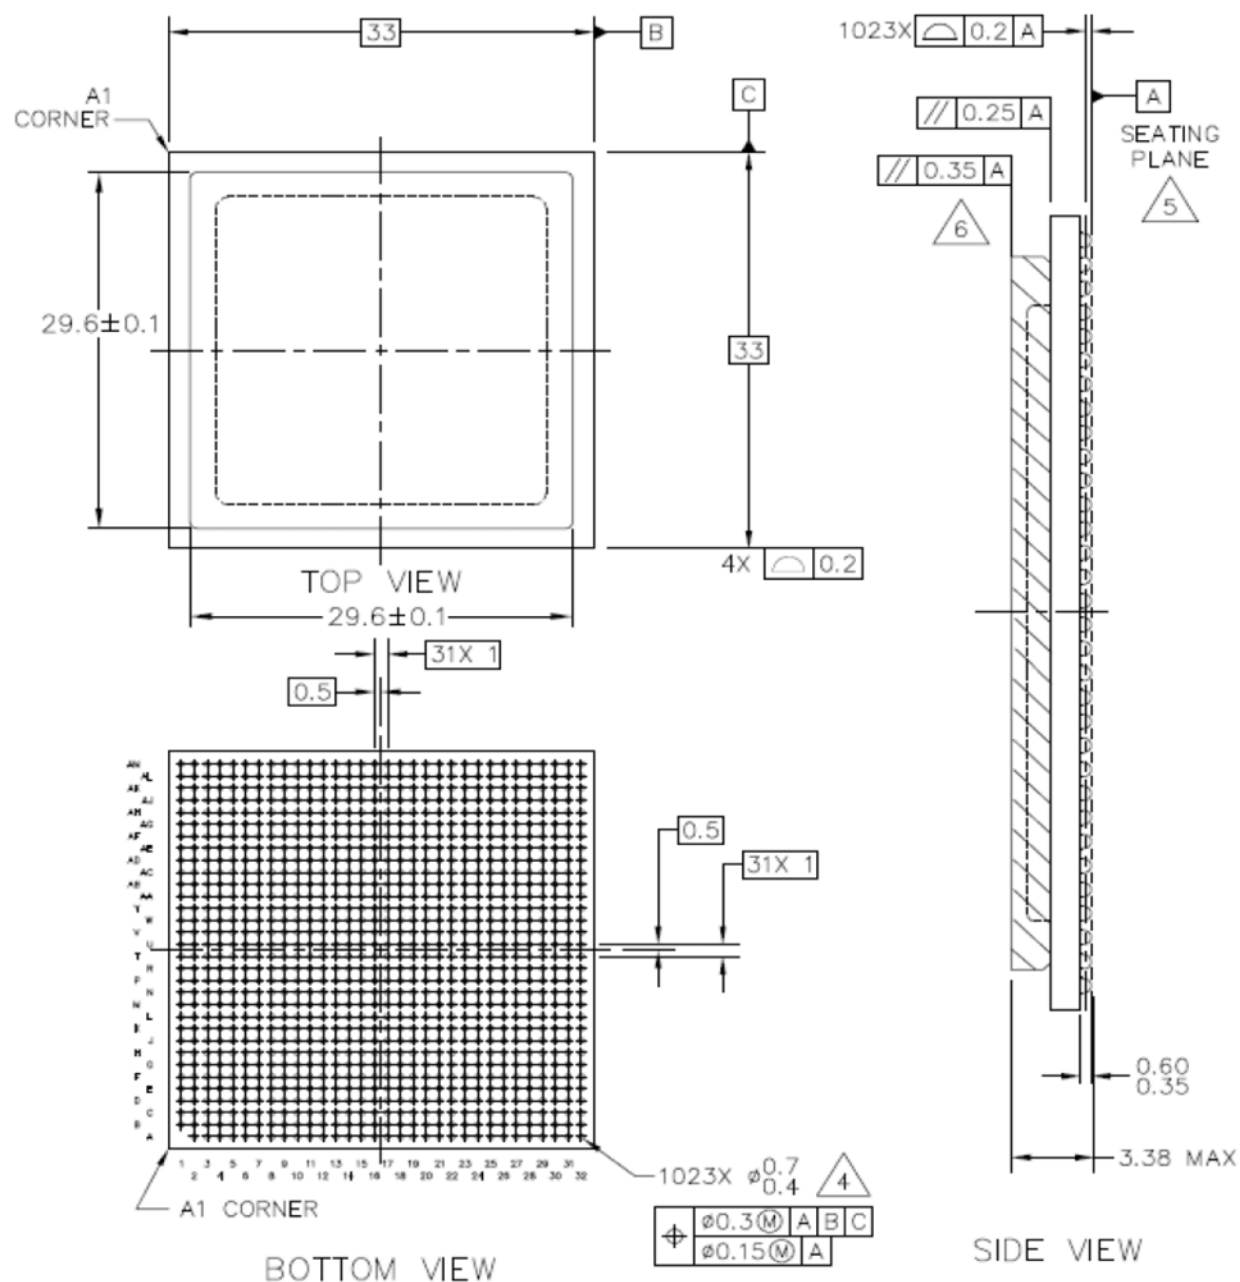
Mechanical Dimensions of the MPC8572E FC-PBGA with Full Lid
